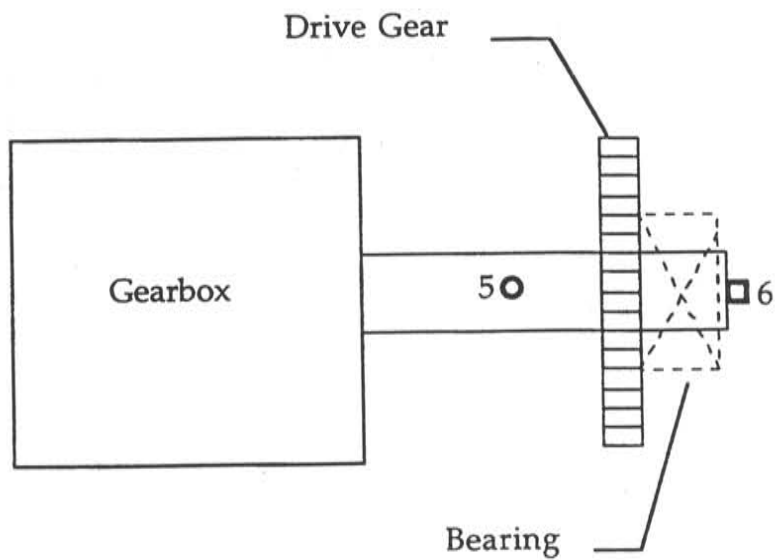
Schematic Layout of AE Sensors on the Drive Shaft
